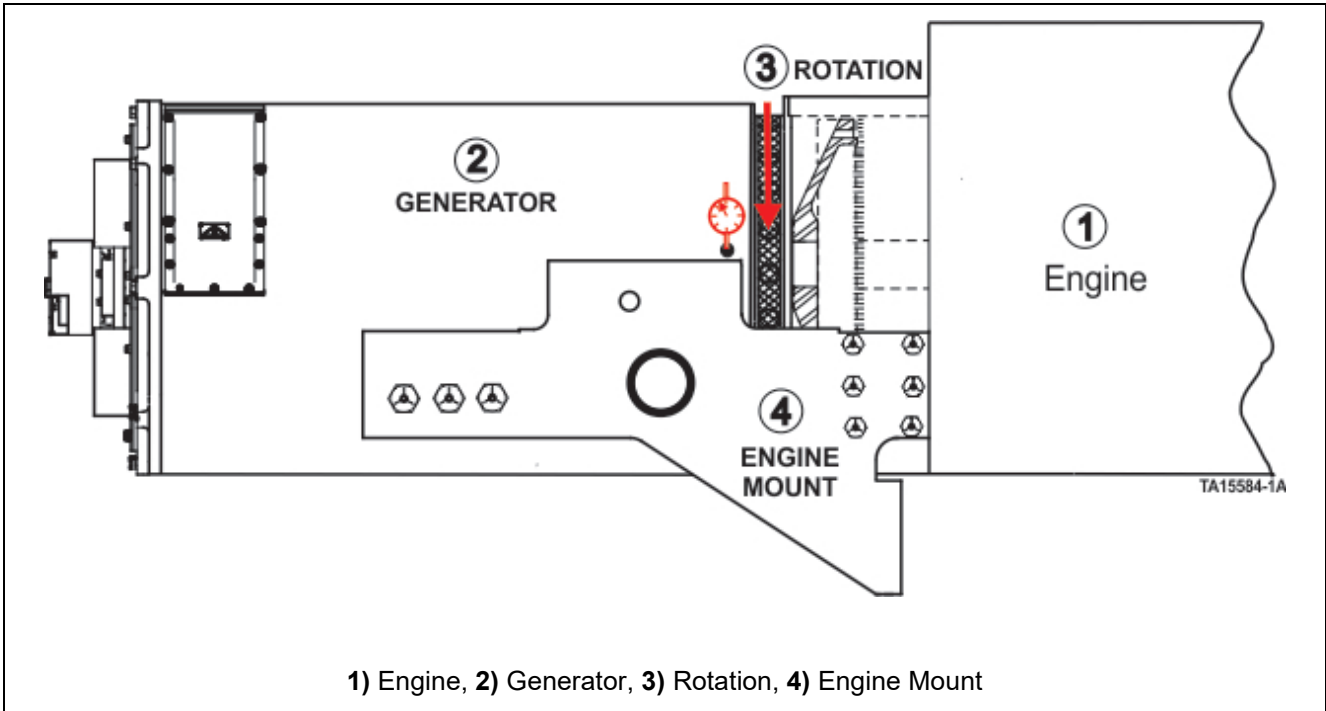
Rotor shaft runout check (G200 Gen 2 - Tier 1)
